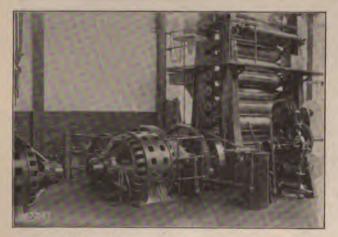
HOLYOKE MACHINE CO. CALENDER. ROTOR MOTOR
